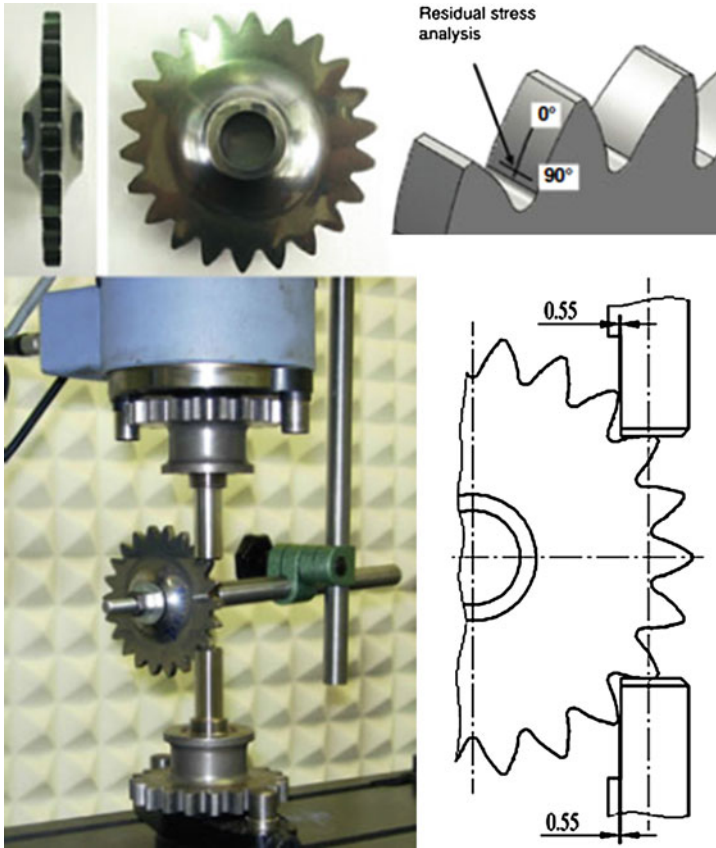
Fatigue Testing on a tooth gear with shot peened steel
